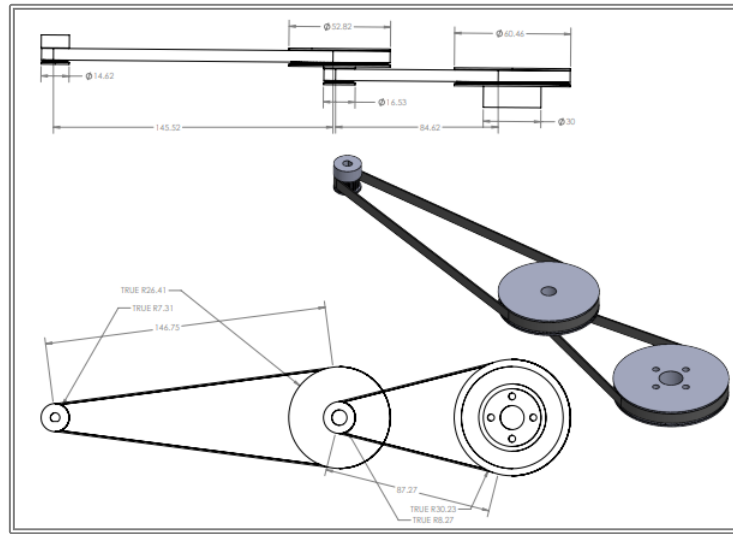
Arm (1) Gear Mechanisms Drawing
